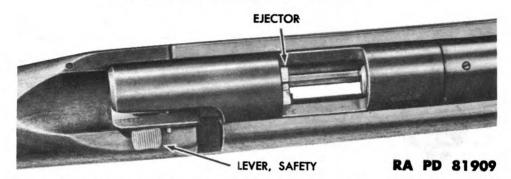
Receiver Section of Winchester Rifle, Cal. .22, Model 75 — Bolt Removed — Top View
